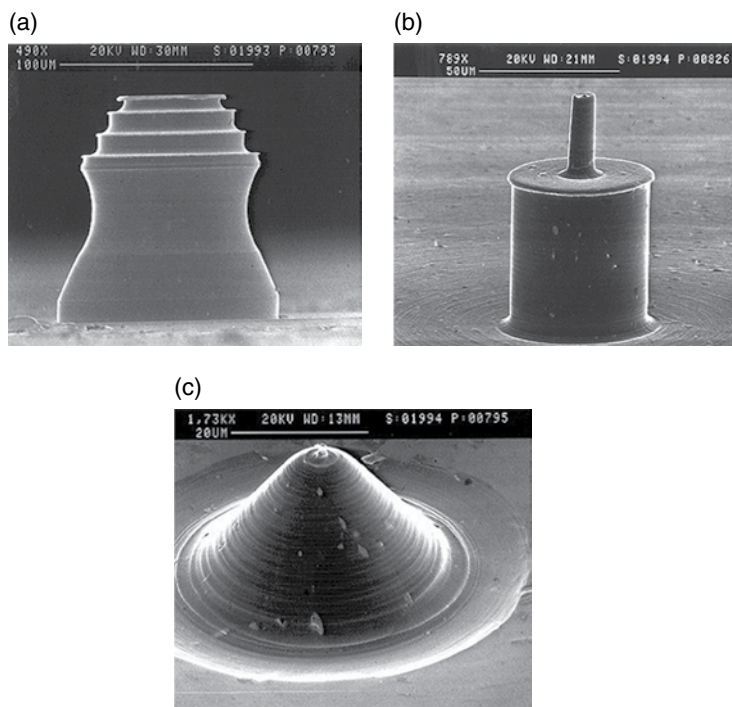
Direct single point diamond turning of micromechanical components. (a) Test workpiece for NC-lathes with micrometer dimensions. (b) Micro-shaft with two different diameters and (c) spherical press mould. Reproduced with permission from [9]. Copyright 1997 IOP Publishing
